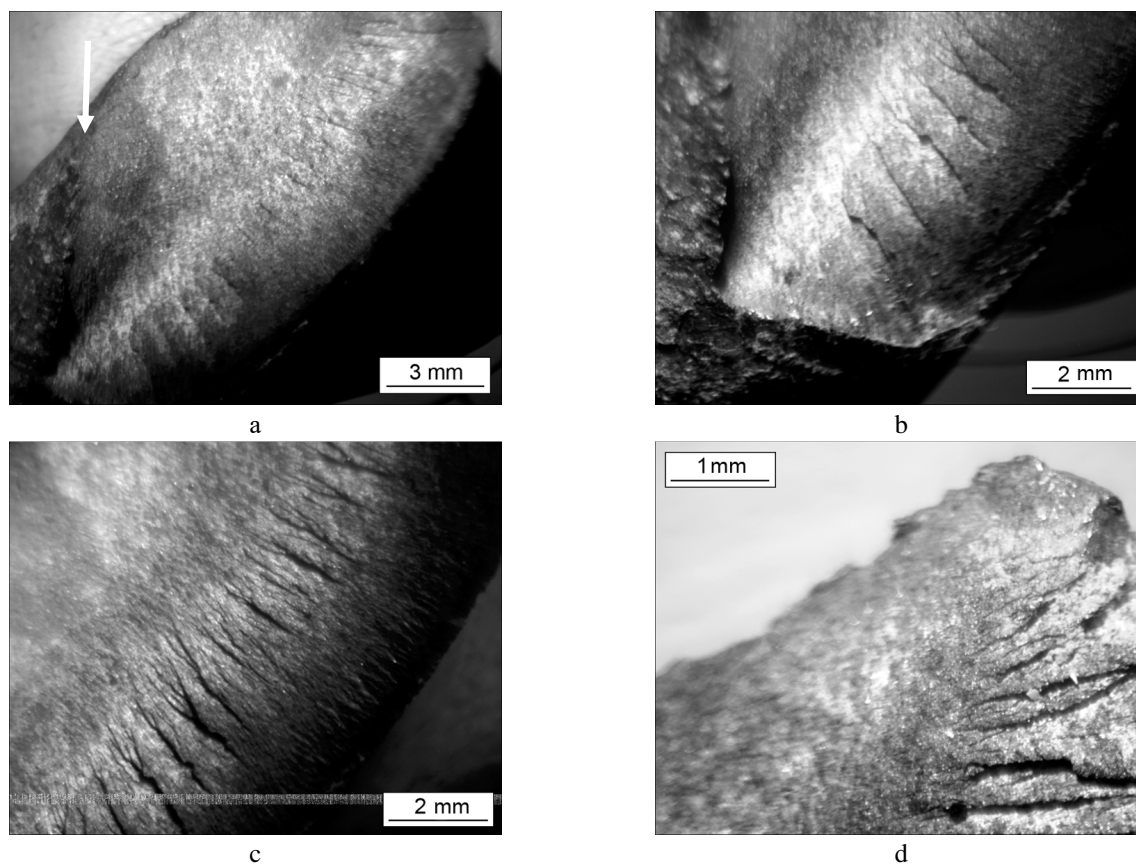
Macrostructures of the zones of the spring fracture surface: (a) the crack origin (indicated by an arrow); (b) transition from the fracture origin to the fatigue crack propagation zone; (c) the fatigue crack propagation zone; (d) the fast fracture zone
